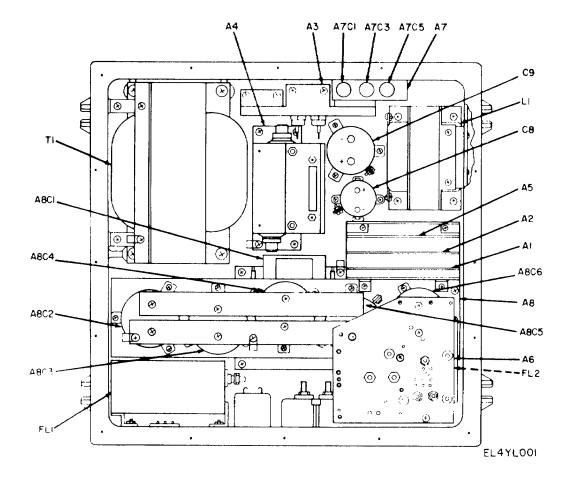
Power supply PP-6224A/U, top view, parts location.
